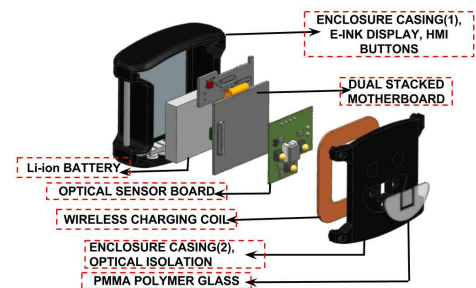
Exploded view of the device showing the arrangement of all the modules.
